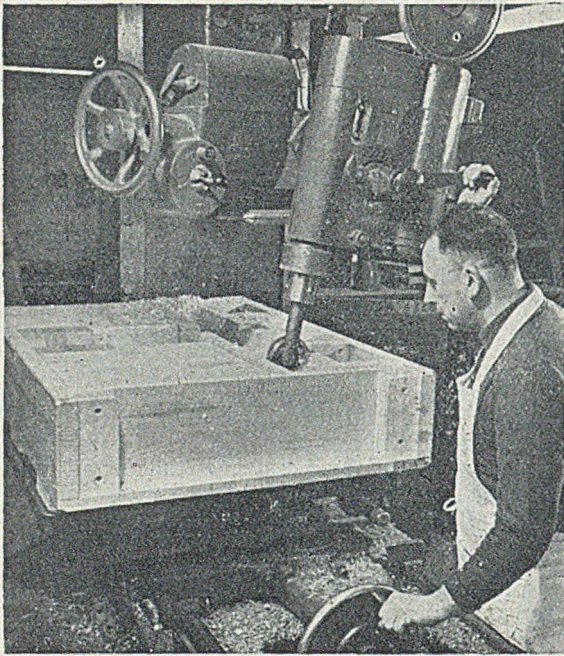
Wadkin Pattern Miller engaged on a Corebox at the Works of G. Perry & Sons, Leicester.
